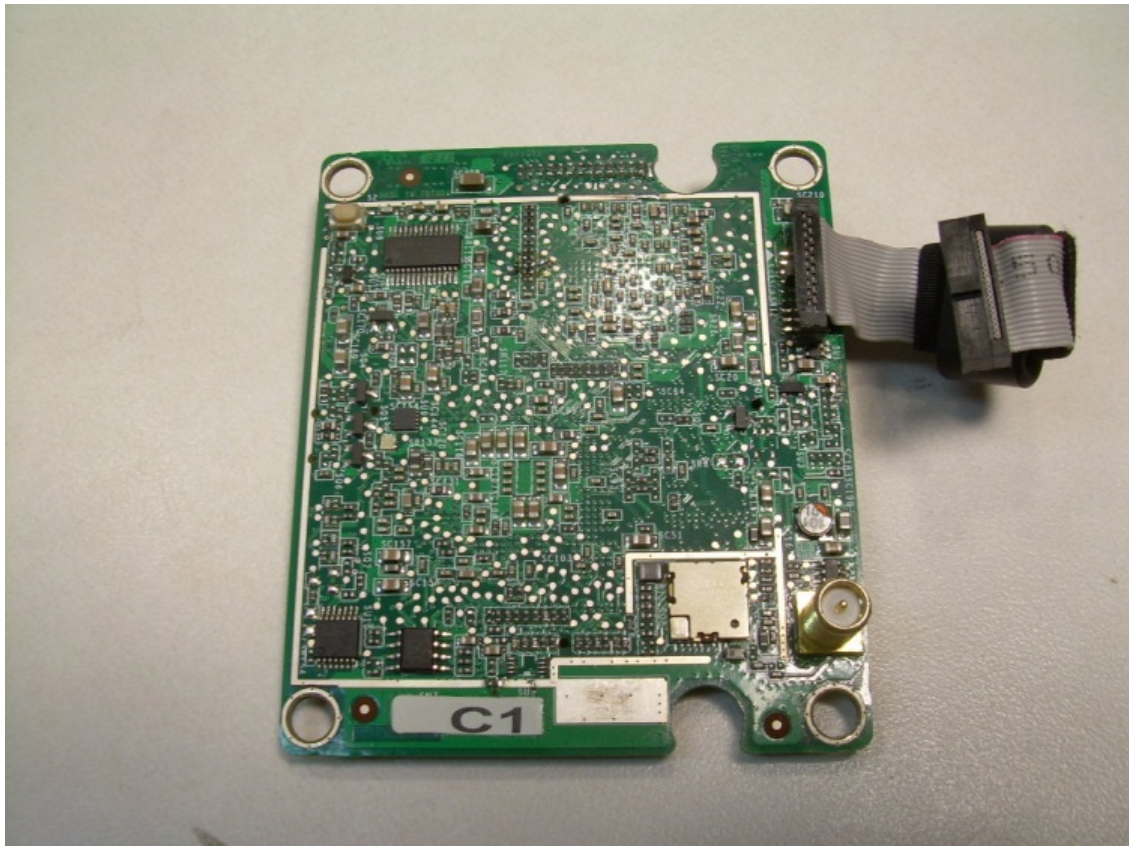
View of the EUT with Back Box and Power PCB Removed
